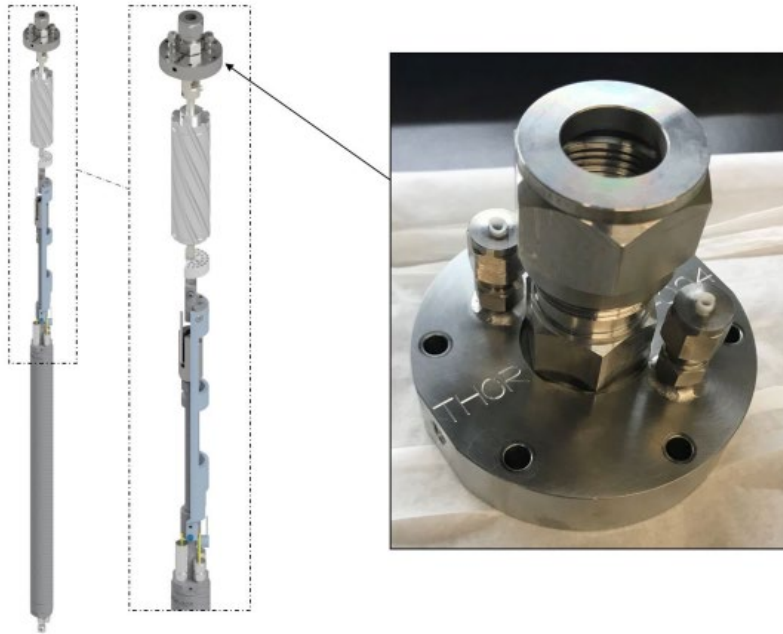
As-built top flange weldment and pictorial description in the THOR assembly.
